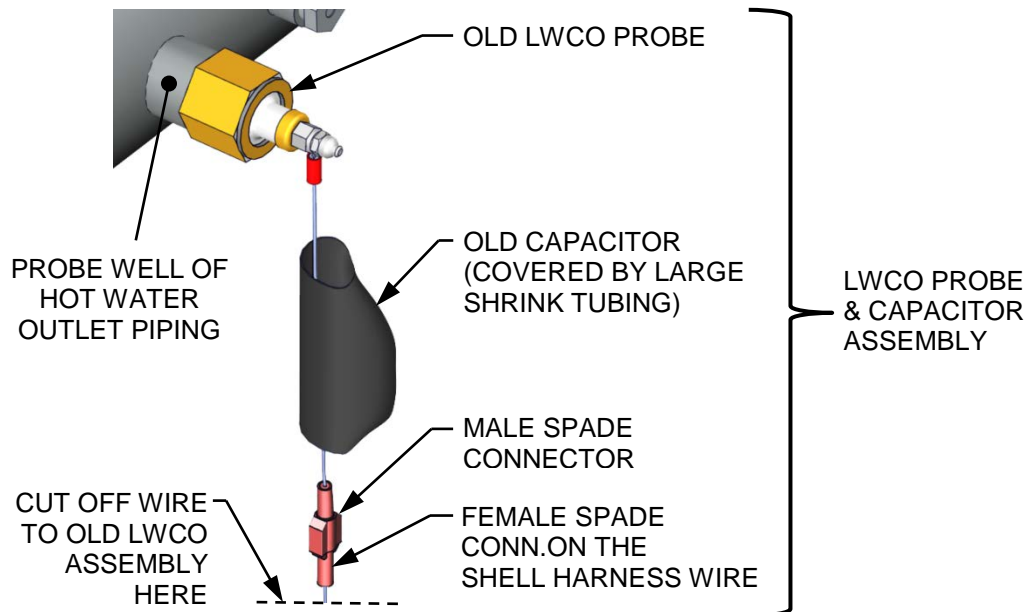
Removing Old LWCO Probe/Capacitor Assembly
